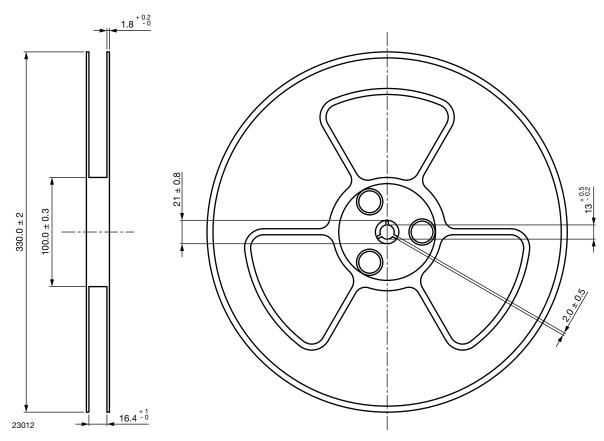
Tape and Reel Packaging (1000 pieces on reel)
